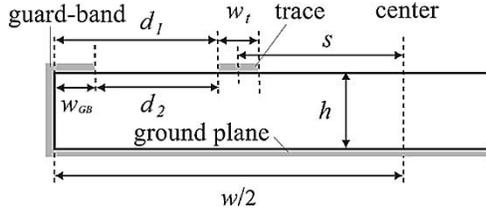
Cross-section of the PCB showing the relevant dimensions.
